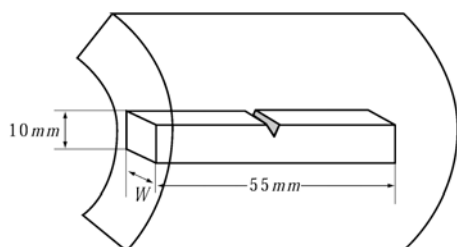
The position of selection for impact test specimen taken from the seamless steel pipes and other portions than weld zone of electric-resistance welded steel pipes
